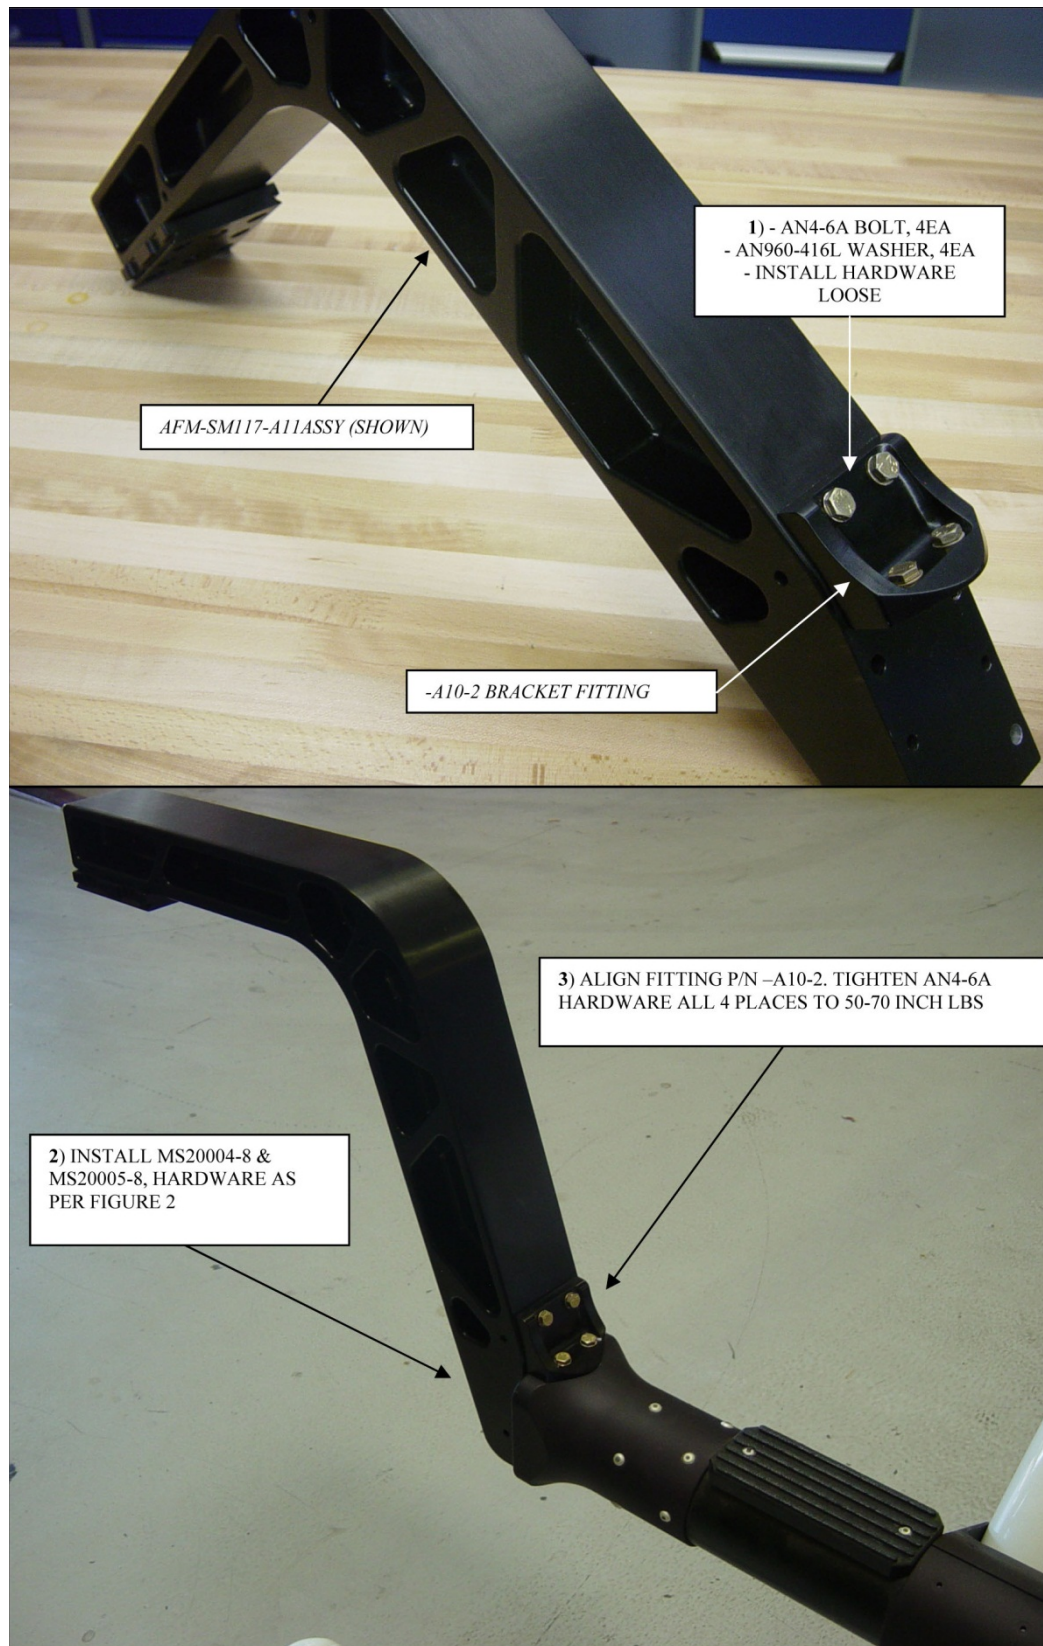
AFM 135-SM135-A10/-A11 Installation Assembly Detail
